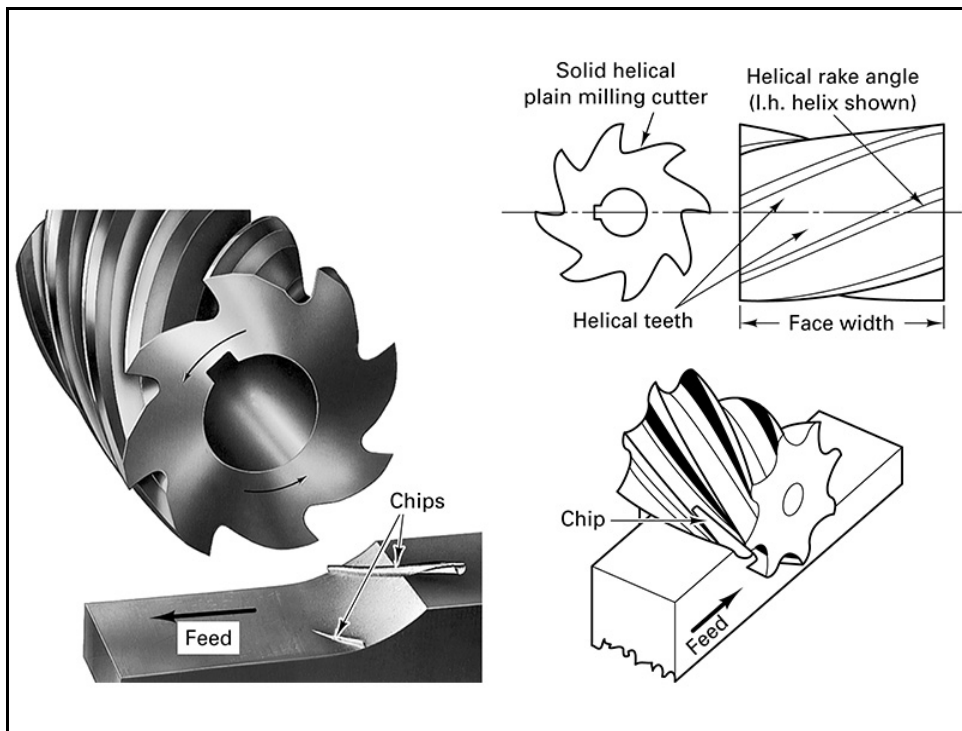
FIGURE The chips are formed progressively by the teeth of a plain helical-tooth milling cutter during up milling.
